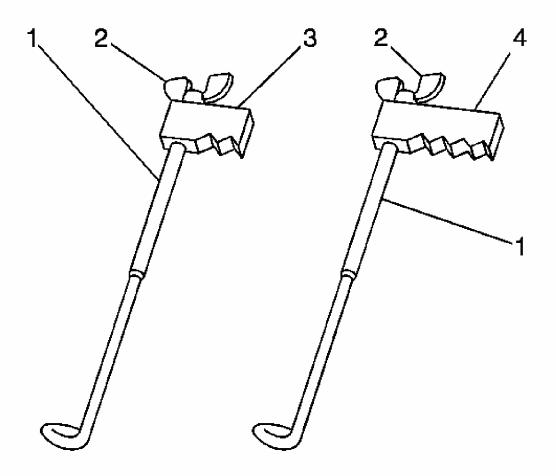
Identifying Timing Chain Retention Tool Components Courtesy of GENERAL MOTORS CORP.
